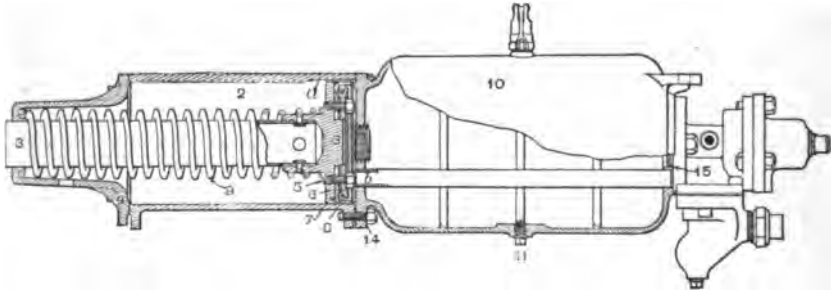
Brake Cylinder and Auxiliary Reservoir.
